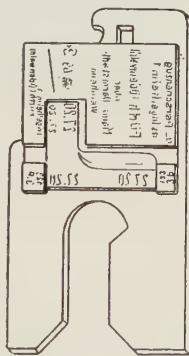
Printing and base plate, A. E. G. machine, with small separate fare plate.
